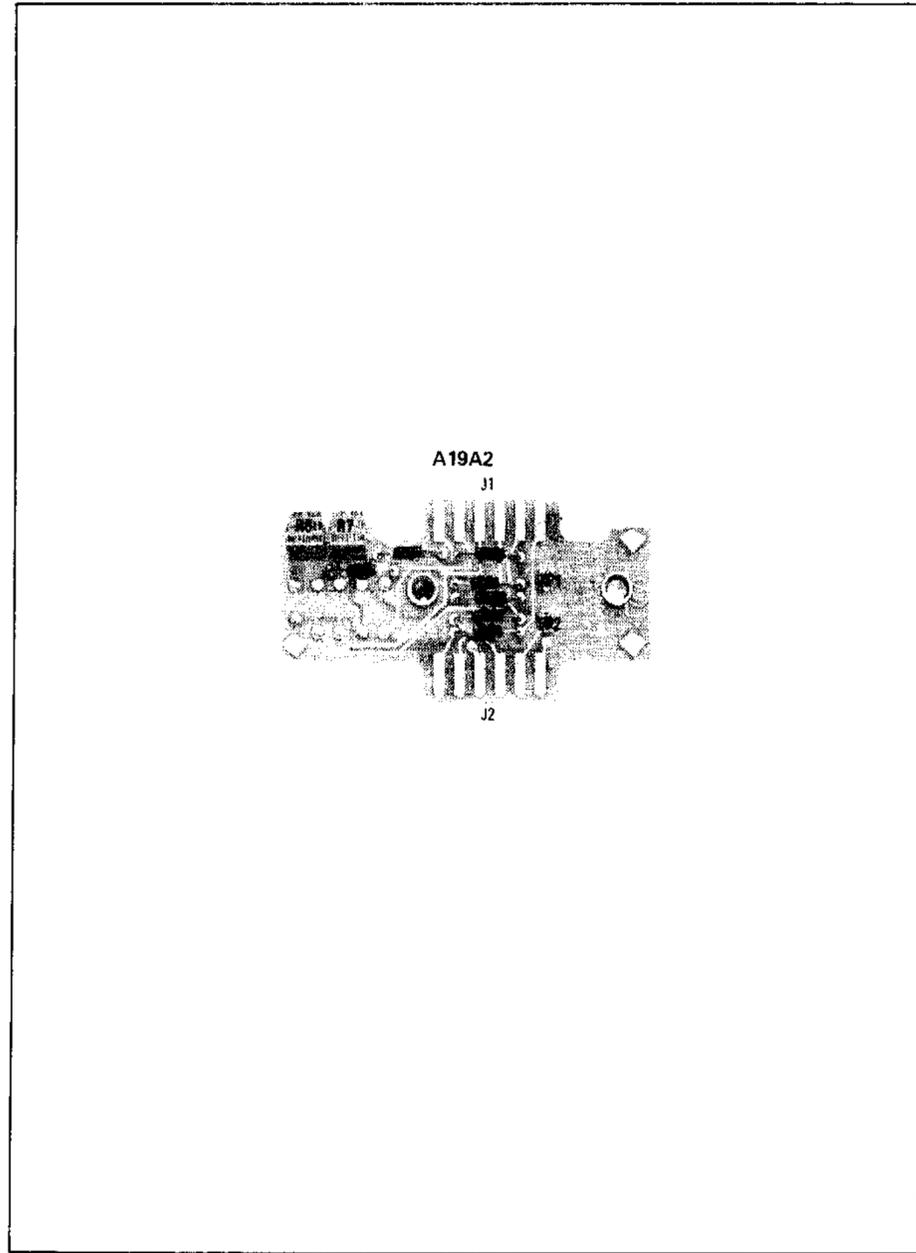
A19A2 RF Vernier Assembly Component Locations
